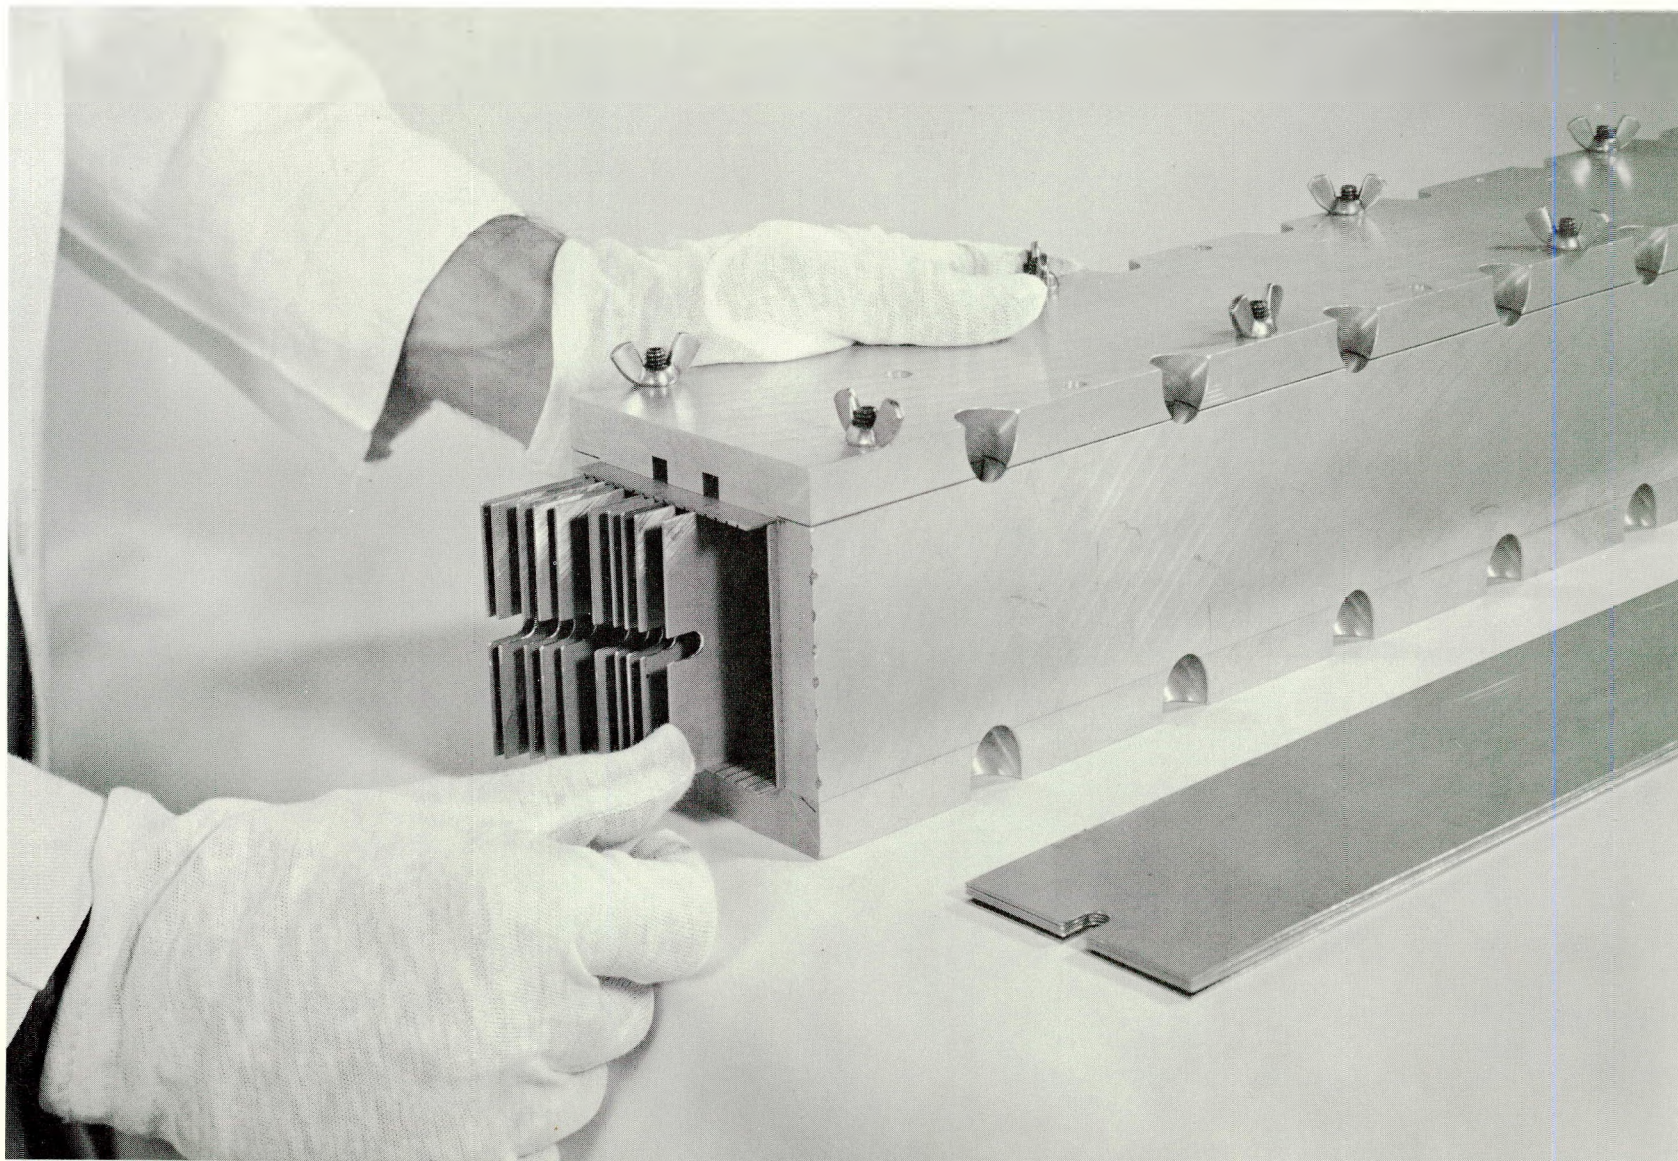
Assembling Fuel Plates into Tack Welding Fixture
